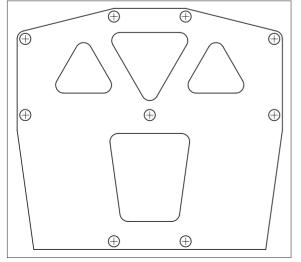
Holes drilled and perimeter hand cut to the lines on the glued template.
